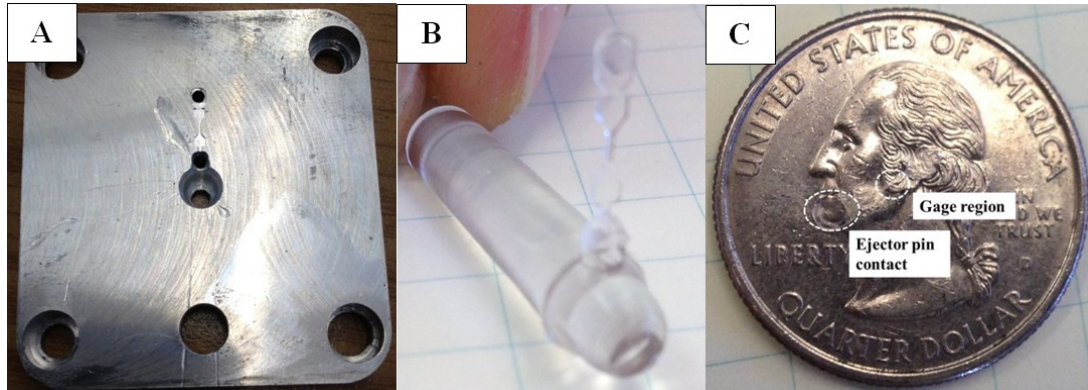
Tensile testing mold insert (A), molded micro tensile bar (B), and tensile bar on quarter for reference (C).
